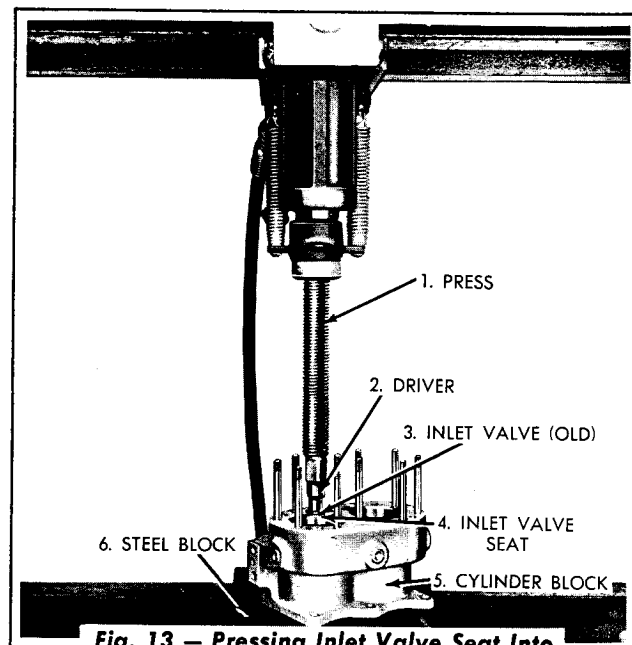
Pressing Inlet Valve Seat Into Cylinder Block
